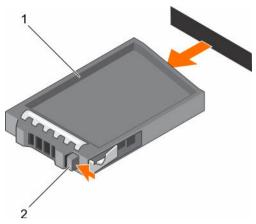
Removing and installing a 2.5 inch hard-drive blank
